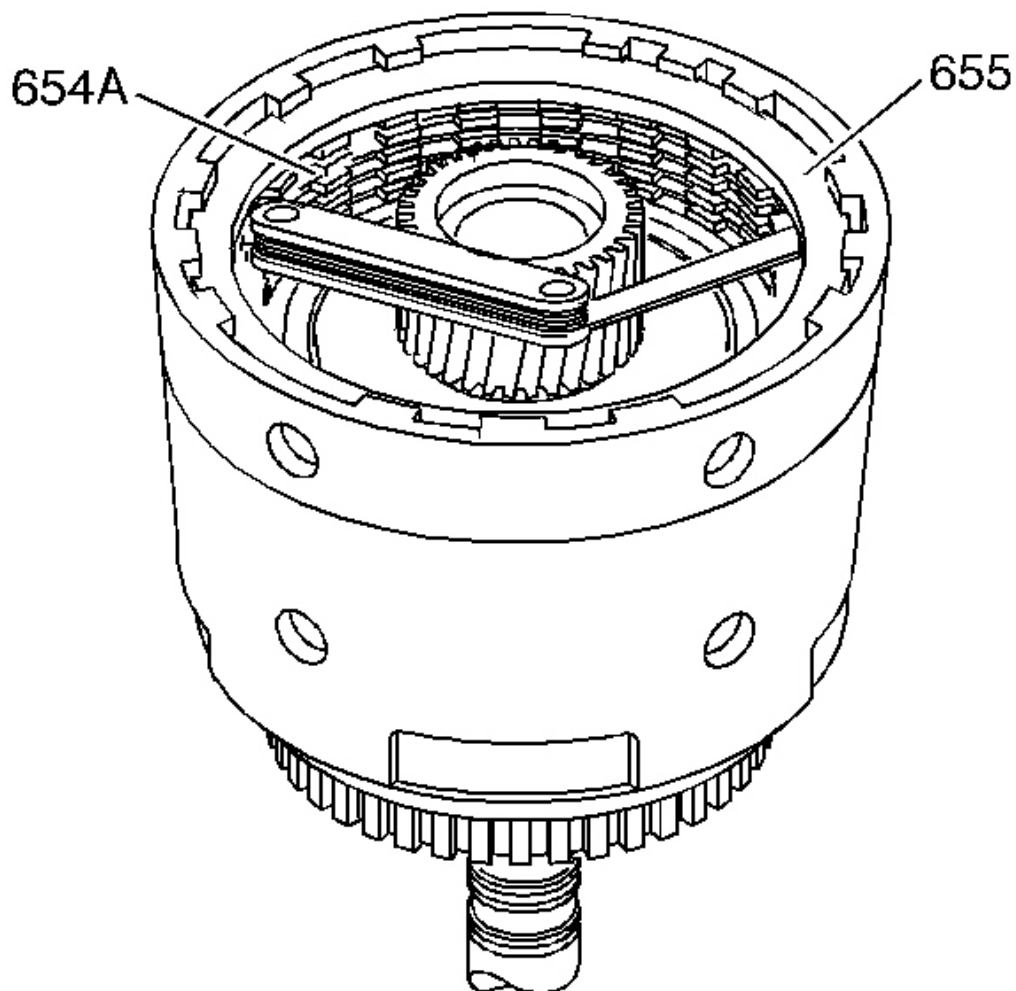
Checking 3rd & 4th Clutch Plate Travel
